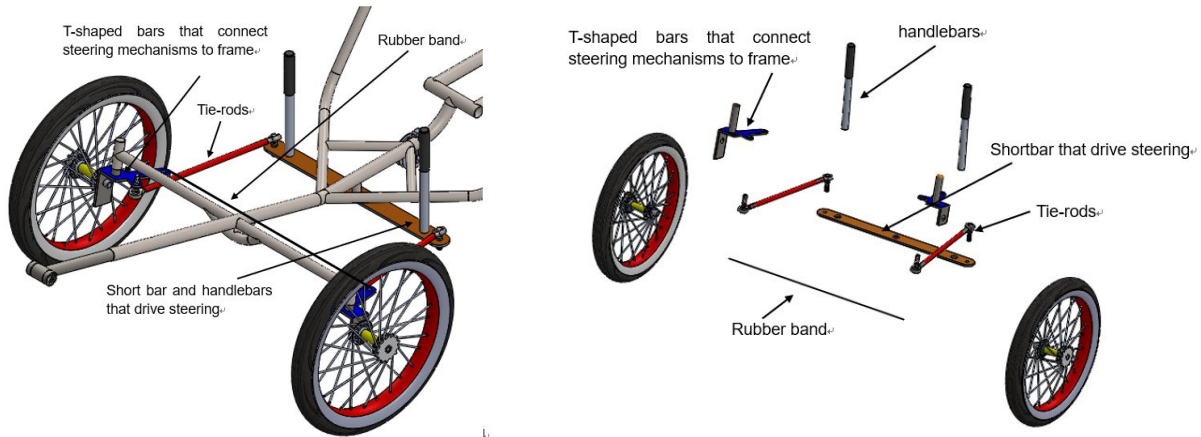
Steering mechanisms collapsed (left) and exploded view (right)
